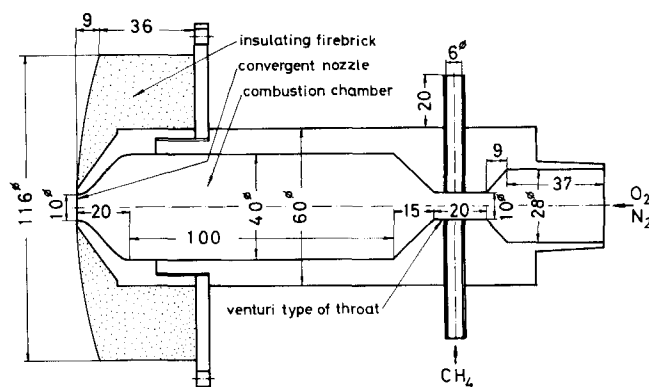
Circular convergent nozzle having a combustion chamber. Dimensions given are in millimeters.
